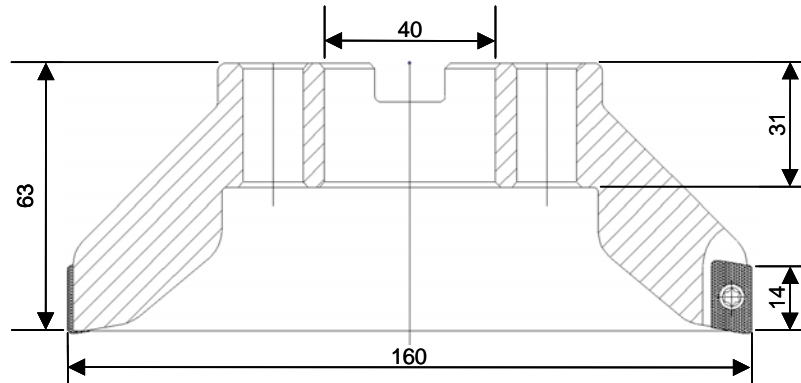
Tool holder cross-section indicating the span of the tool and the insert cutter placement. Four inserts were used in total. All dimensions in millimeters.
